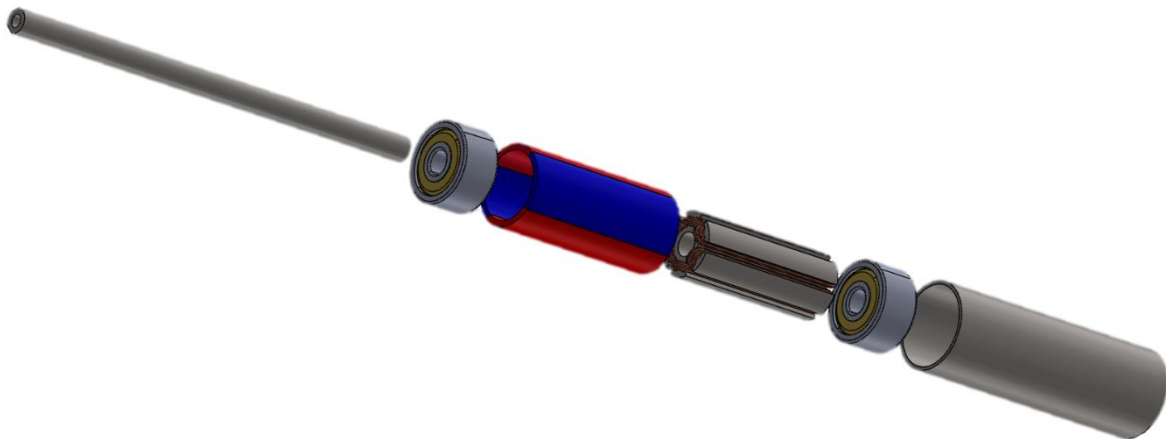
Exploded view of the actuator with two added bearings. In the center of the shaft a hole is made to allow the electrical wires pass through.
